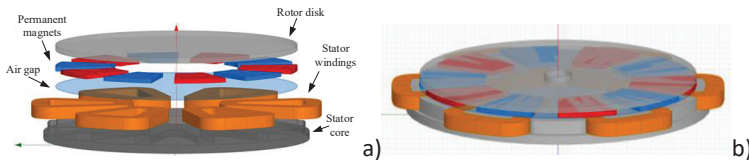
Single-sided AFPMG: a) components of the machine, b) model of the machine
